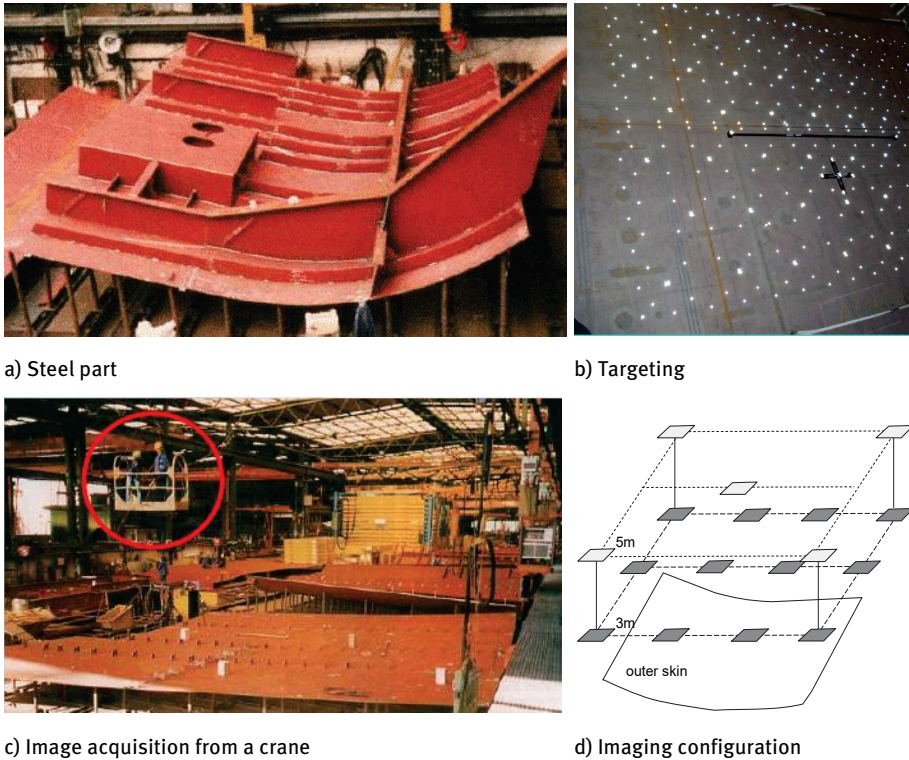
Photogrammetric acquisition of welding shrinkage (Hexagon).
